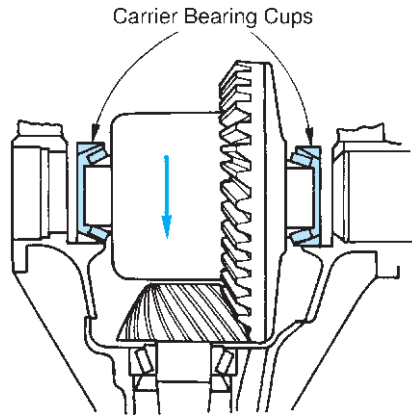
When checking for the size of the backlash and carrier bearing preload shims, remember that the carrier bearing cups will try to spread from the weight of the differential and thus try to give a false reading.
